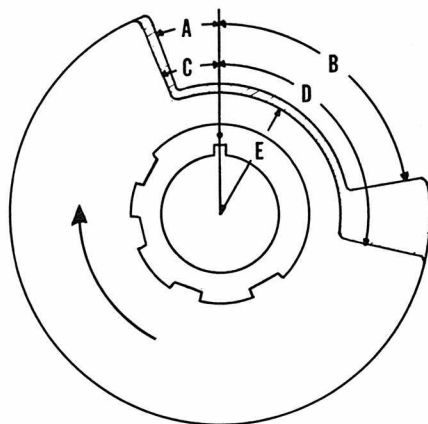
Rotary valve may be modified to alter performance. Refer to text for exact dimensions.
